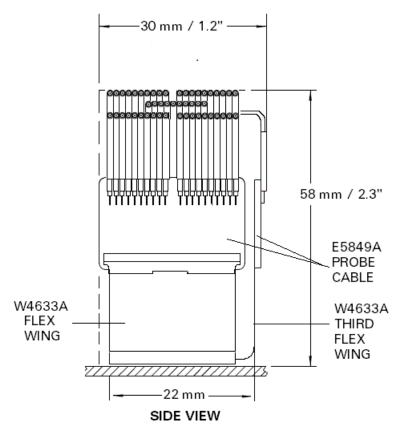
KOV of a W4633A interposer with an E5849A cable (SIDE VIEW)
